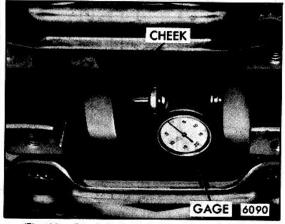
Crankshaft Distortion Measuring Gage Mounted on Crankshaft.
